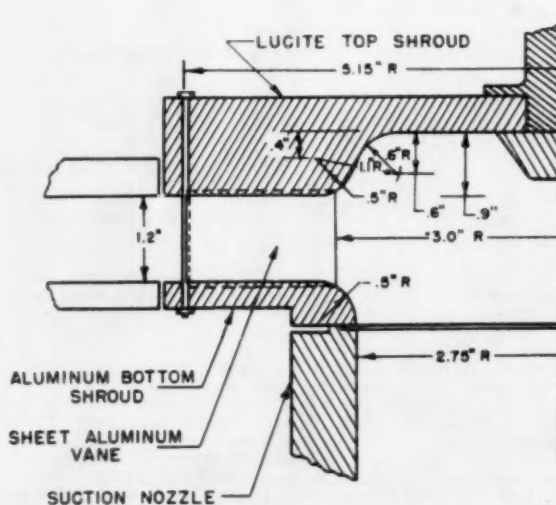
CROSS SECTION OF TWO-DIMENSIONAL IMPELLER
